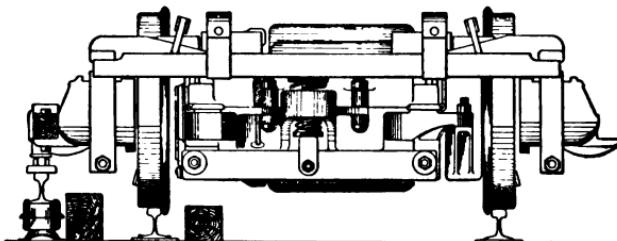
CRADLE SUSPENSION (Front Elevation).
